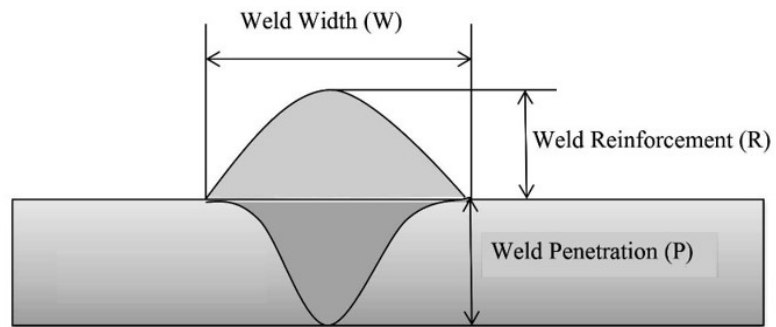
1 Schematic diagram of weld bead dimensions
